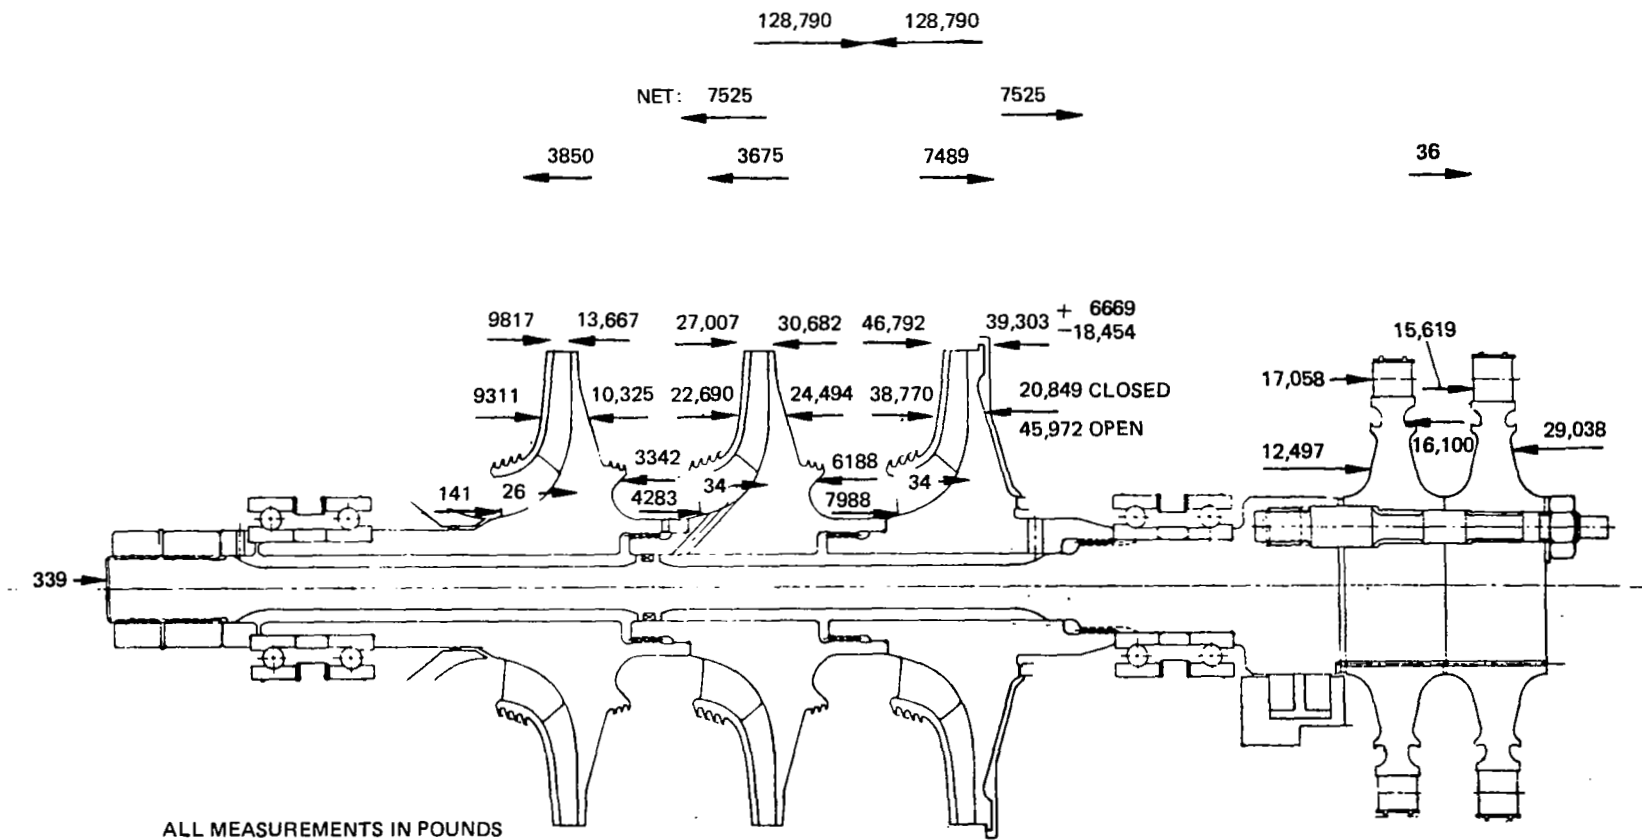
Mark 48-F Turbopump Axial Forces (English Units)
